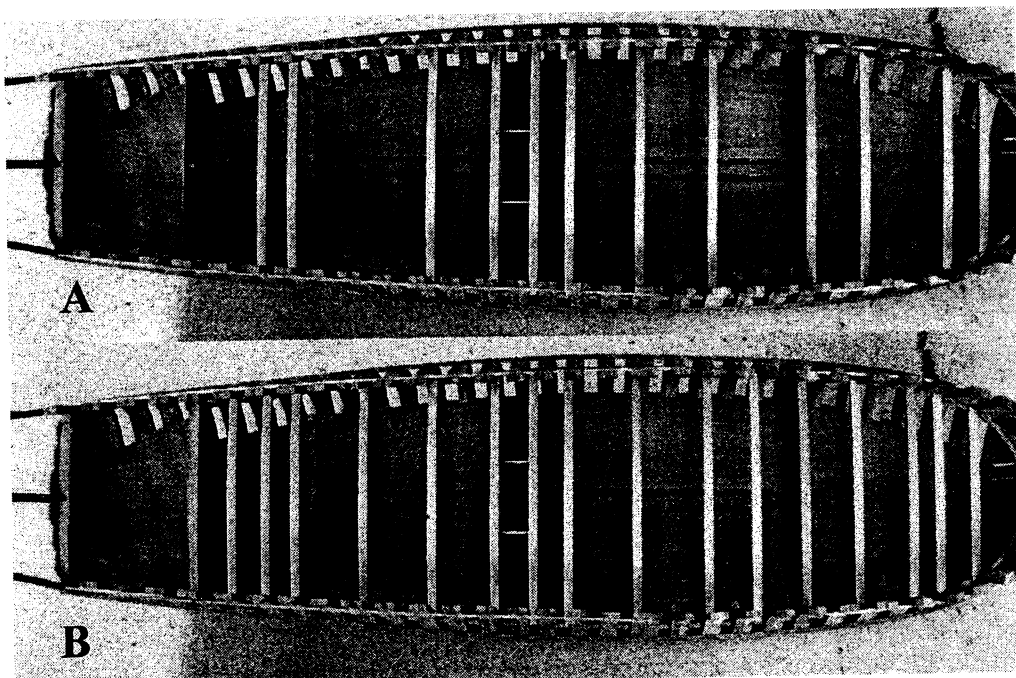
A. Installation of deck beams necessitated by hatches, mast partners and windlass. B. Installation of three remaining deck beams to bridge the remaining spans of deck. Photos by G. Grieco.
